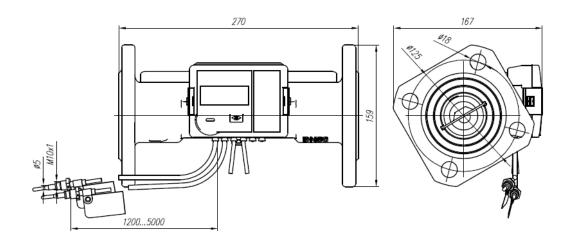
Flow sensor q_p= 15,0 m³/h; flanged end connection DN50, Mounting length L=270 mm
